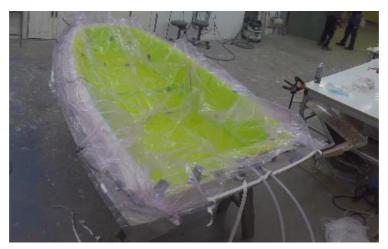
Building and attaching/sealing the vacuum bag to mold.
